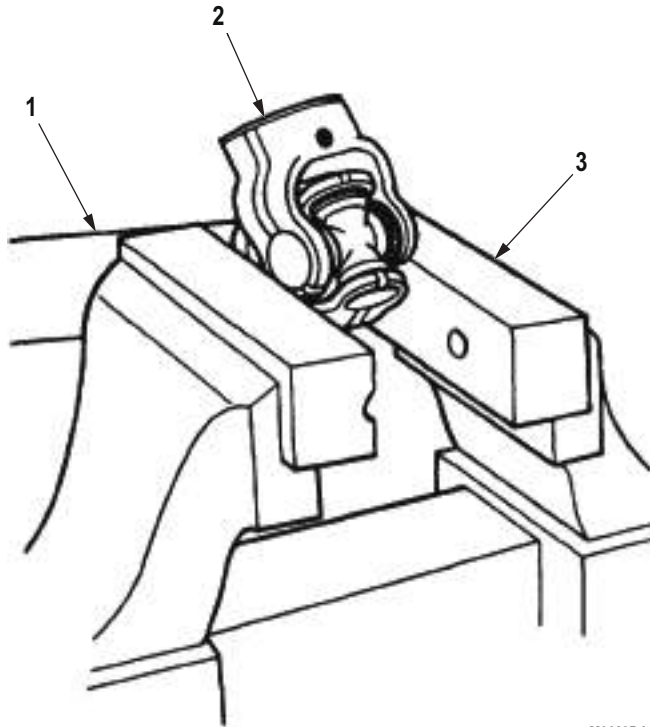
Transmission PTO-To-Hydraulic Pump Propeller Shaft Removal.
